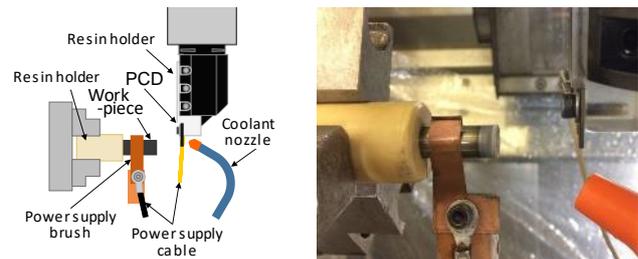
Experimental setup on 5 axis multi-tasking lathe
